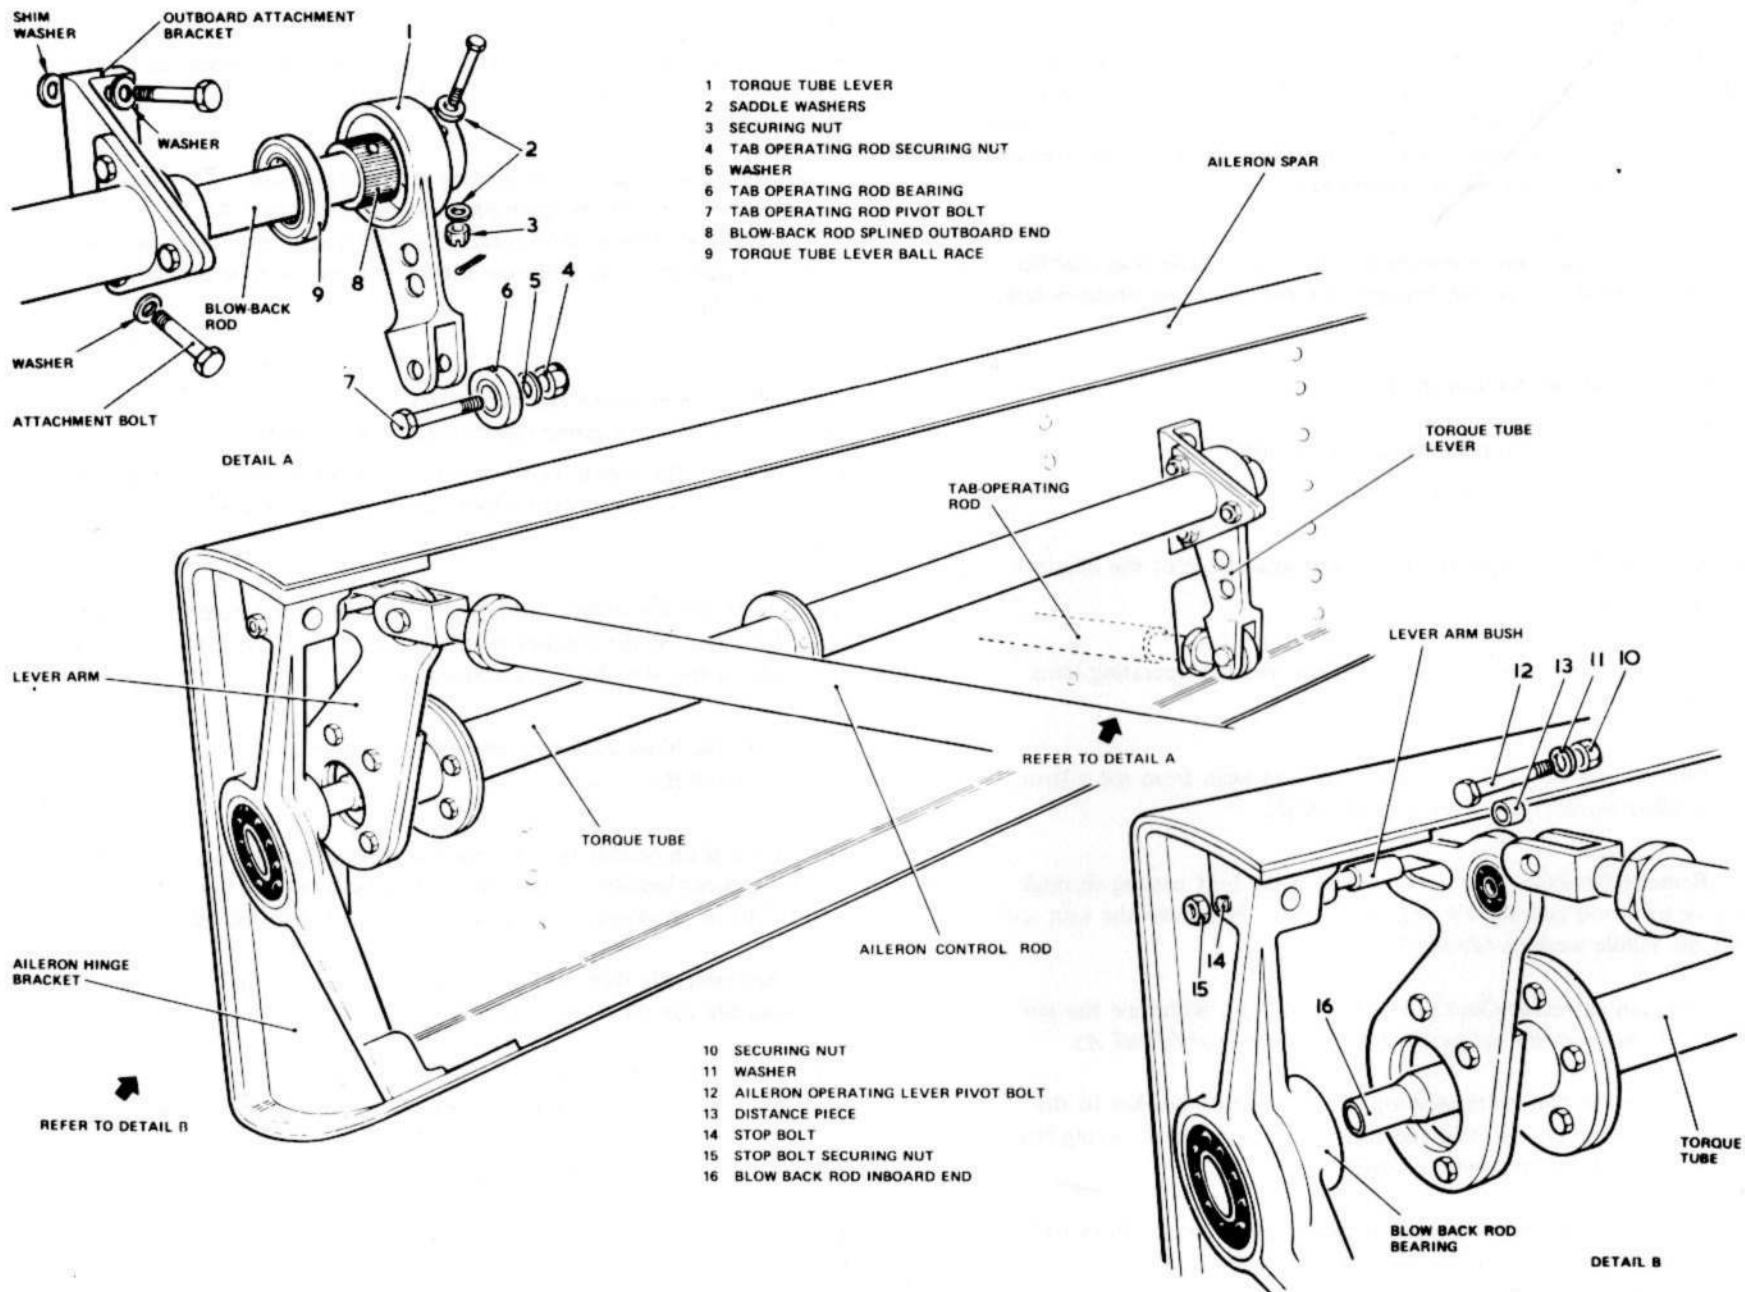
AILERON SPRING TAB MECHANISM REMOVAL
